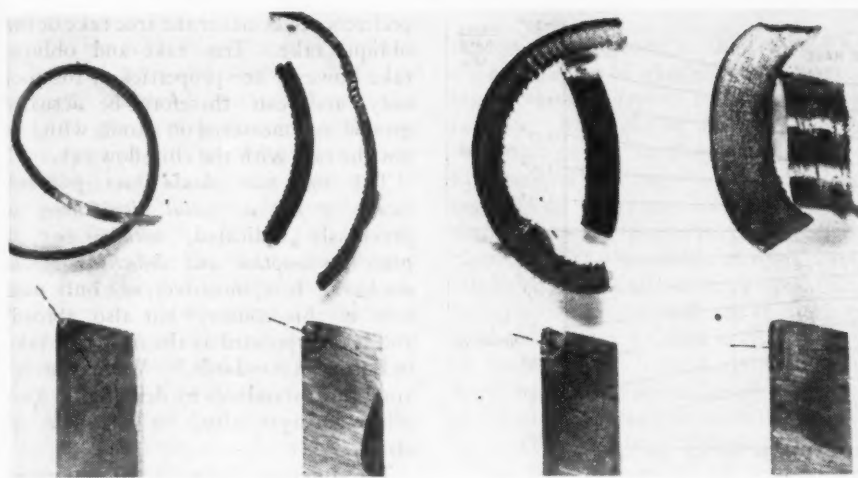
VIEW OF CHIPS AND FACE OF FOUR TOOLS SIMILAR TO THOSE OF FIG. 1 WHEN TURNING SAE 1045 STEEL ANNEALED AT 80 FPM
